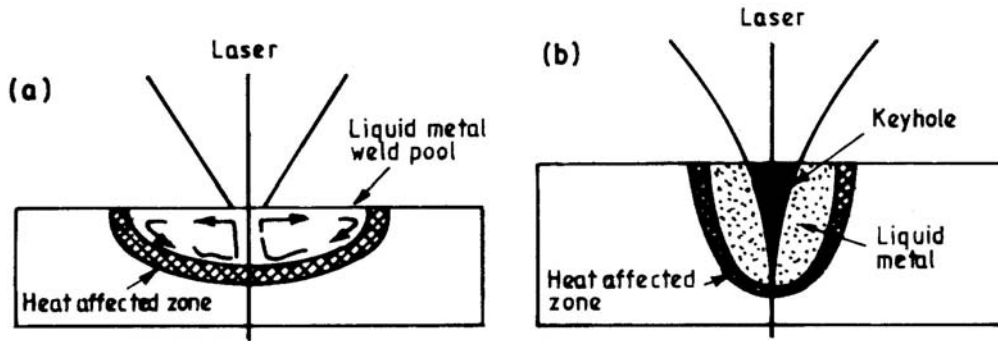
Schematic view of (a) conduction melt pool, and (b) deep penetration welding mode. The surface boiling and marangoni effect are more in (a)
